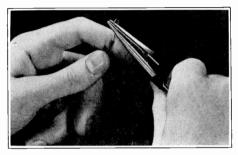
Forming a hook on solid wire with long-nose pliers, preparatory to making a soldered hook joint.
